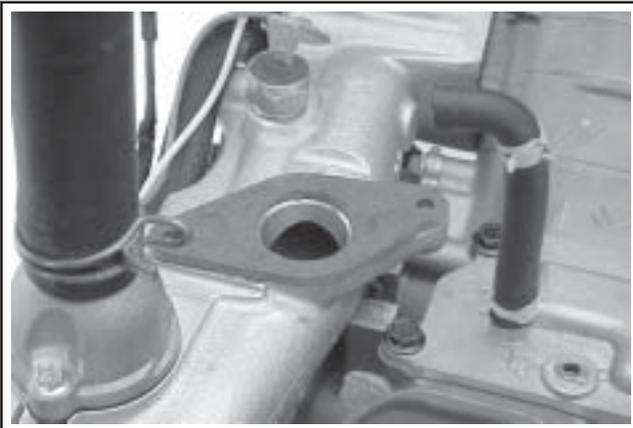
Installing Carburetor Gasket on Intake Manifold.
